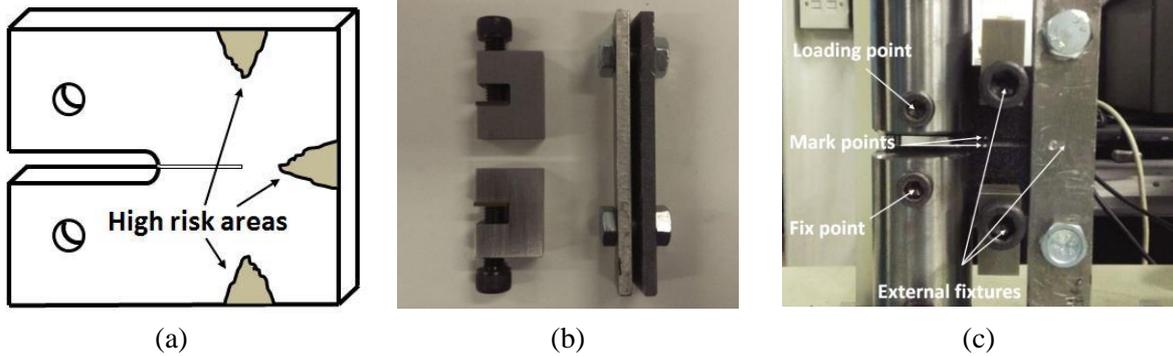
a) Susceptible regions b) external fixtures and c) assembly of specimen and fixtures.
